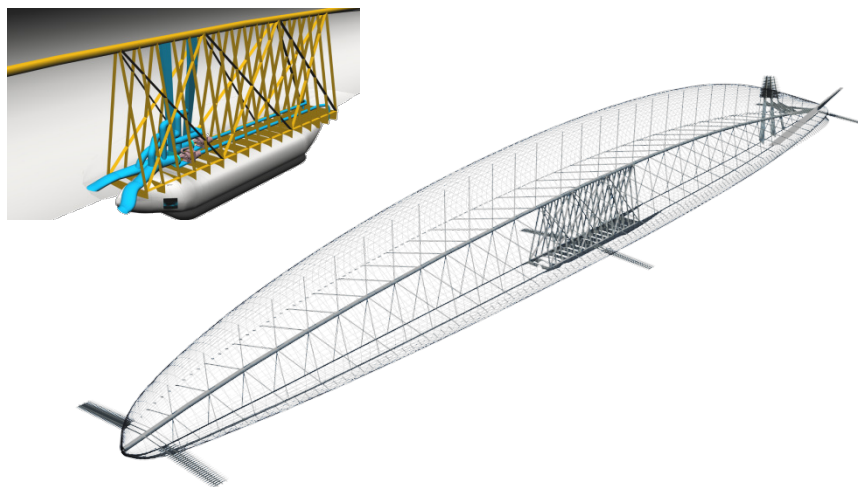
The envelope structure shows the complex arrangement of trusses to support the immense weight of the system. Insert shows detail of gondola connection.
